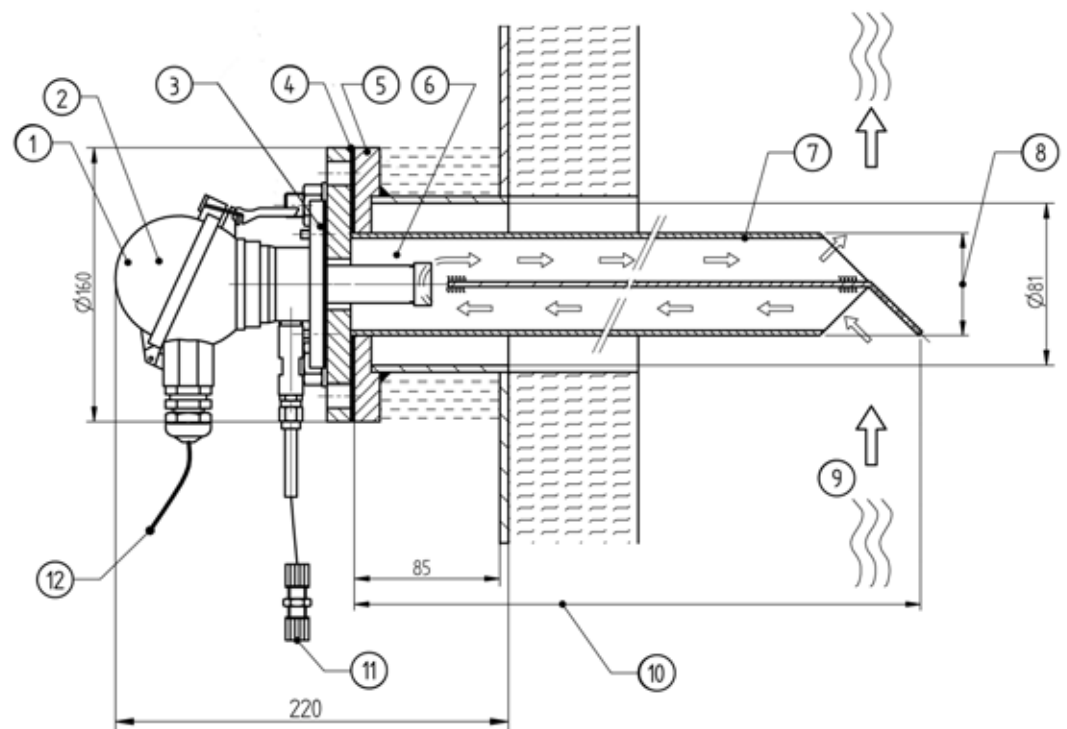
Dimensional drawing Lambda Probe LS2-HT with flue gas bypass tube
